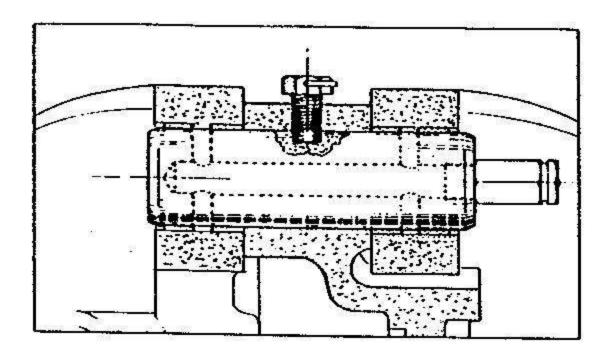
SECTION THROUGH BRAKE PIVOT PIN
